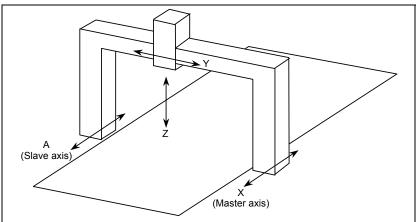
(a) Example of machine with X and A being synchronous axes
